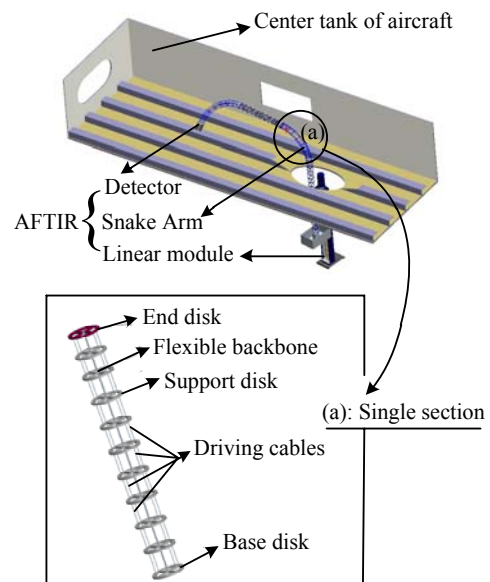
Pro-E simulation of aircraft fuel tank inspection robot (AFTIR) entering aircraft center tank for inspecting and (a) is the partial diagram of single section of Snake Arm.
